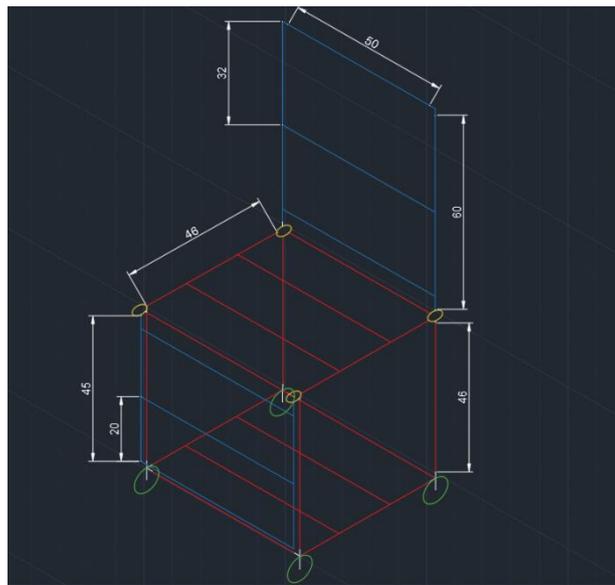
Isometric Line Diagram of wheelchair with link dimensions using AutoCAD
